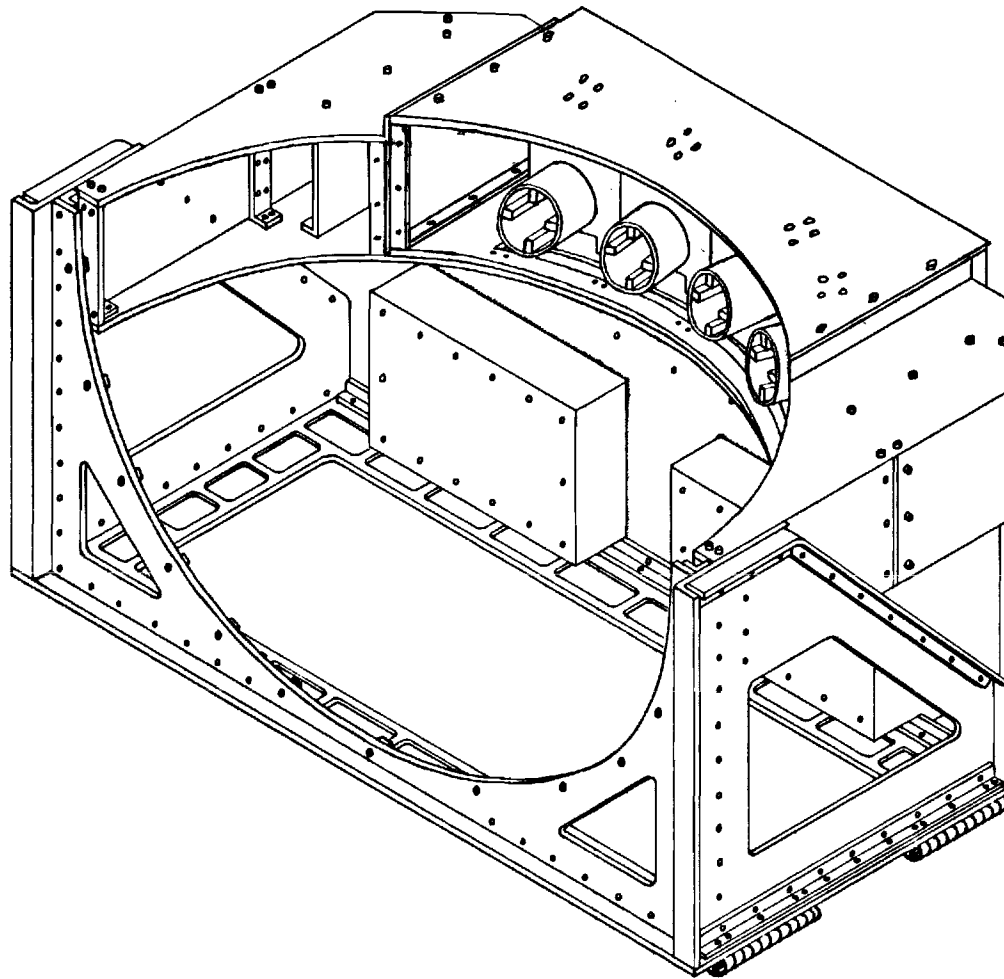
Drawing of the final design for the TASA-II mechanical assembly.
